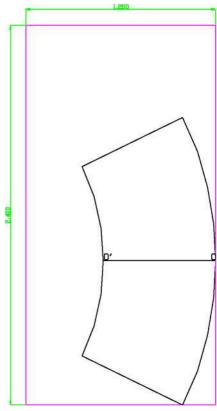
Positioning of the 0'-0 suction tube template on the steel sheeting for marking and cutting
